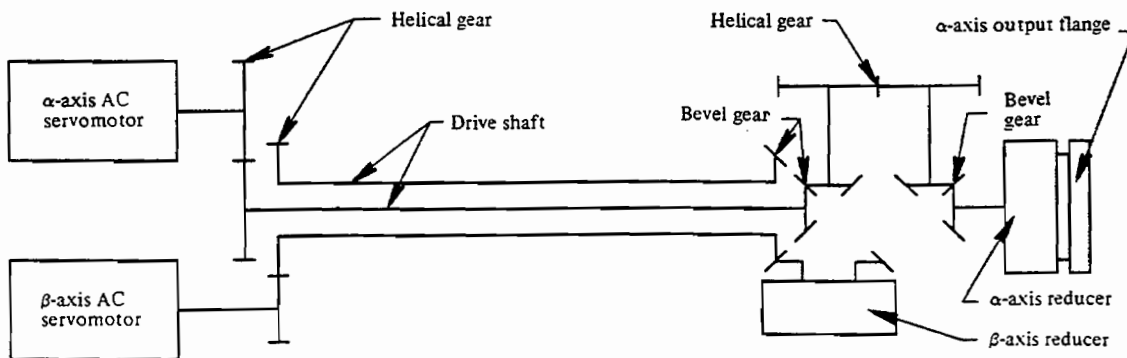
α/β -axis drive mechanism (S-700, in-line wrist)
